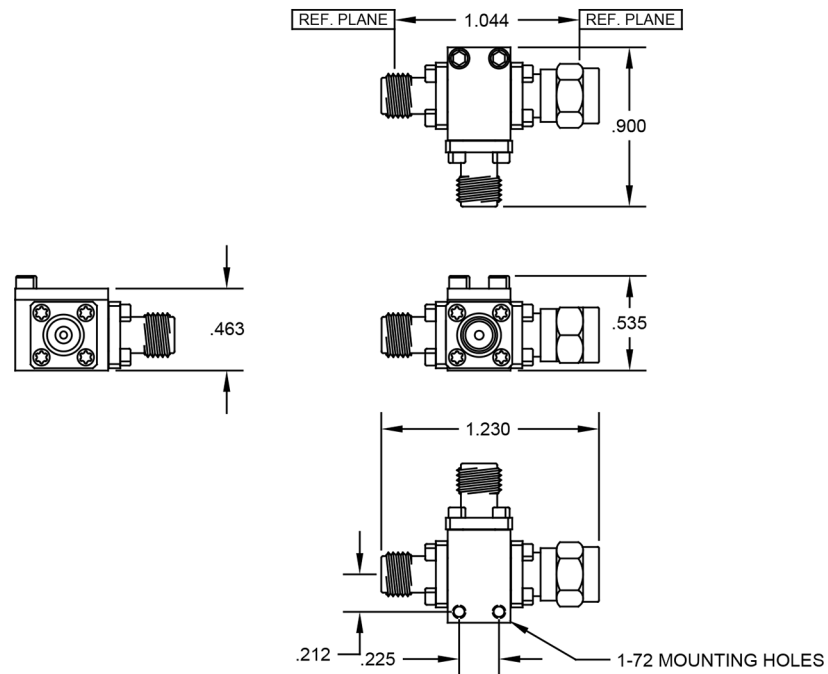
HL9464 mechanical drawing (opt. -JPJ)
